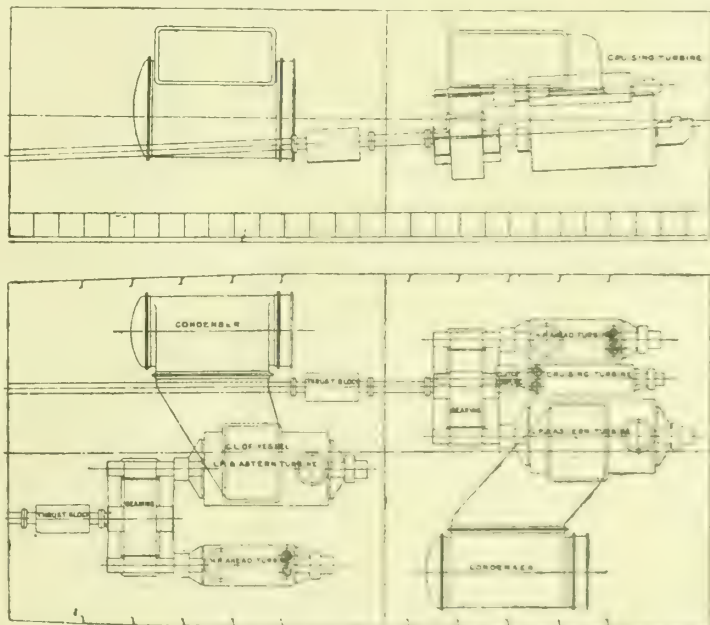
ELEVATION AND PLAN OF TYPICAL INSTALLATION OF GEARED TURBINE MACHINERY FOR A DESTROYER.
